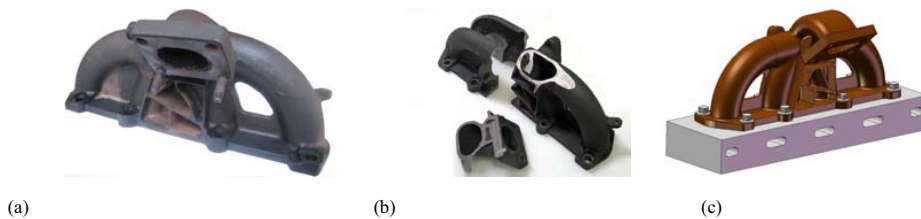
(a) The commercial exhaust manifold; (b) The cut sections; (c) The complete CAD model
